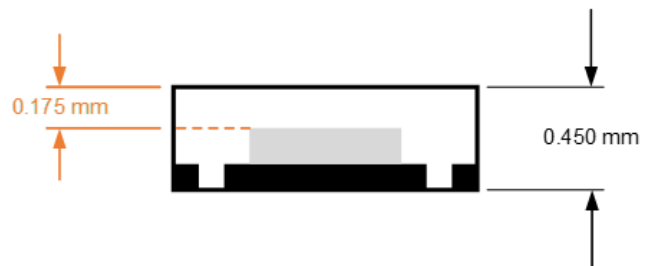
XtremeSense TMR Sensor Location in z Dimension for CT310 in DFN-8 Package
